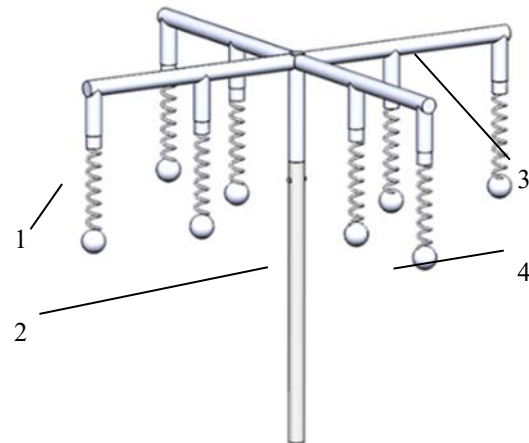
SHELL BREAKING MECHANISM WHERE 1 - BALL HAMMER ; 2 - MAIN SHAFT ; 3 - SPRING FRAME ; 4-SPRING
